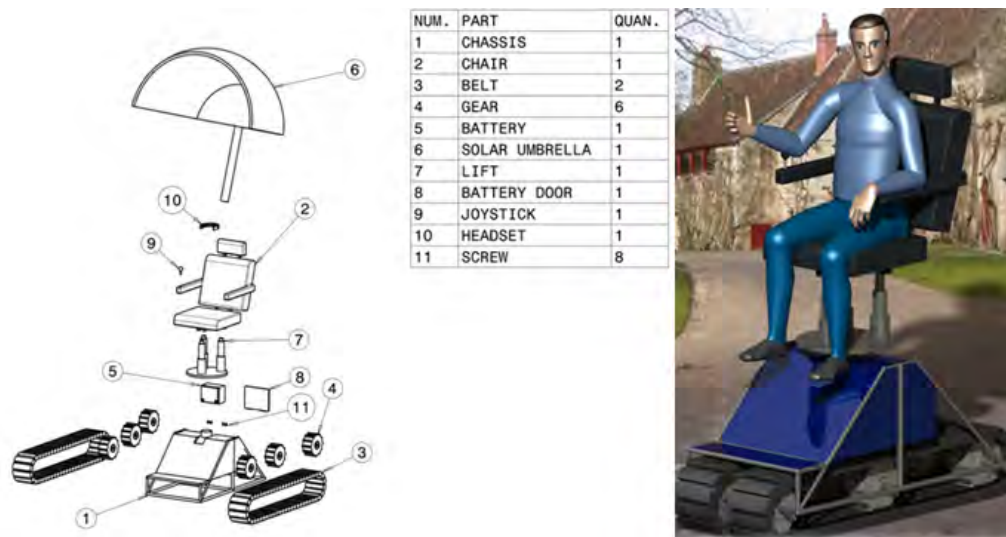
Exploded view and 3-D view of solar powered wheel chair
